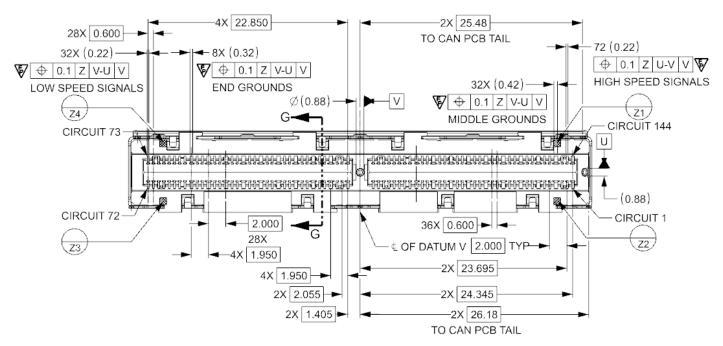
Dual-Bay Bottom View of Fixed-Side Connector
